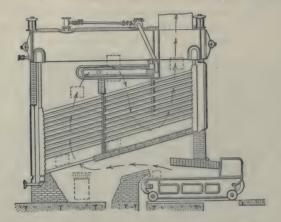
TILE ROOF AND TRANSVERSE PASSAGES.
